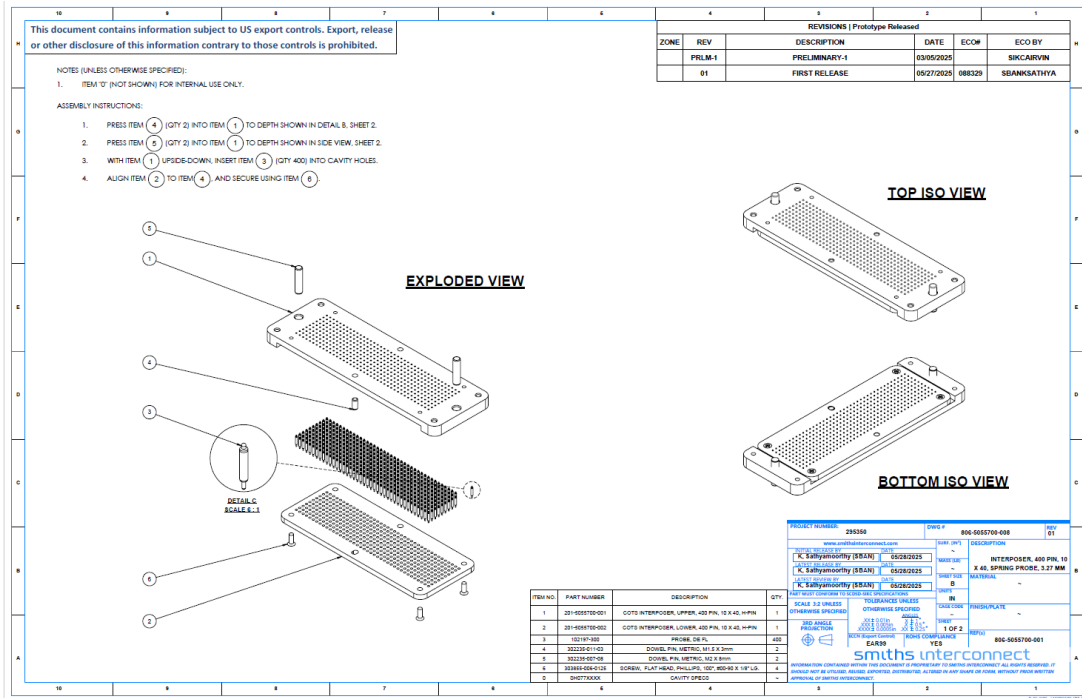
806-5055700-008 Drawing (Sheet #1)
